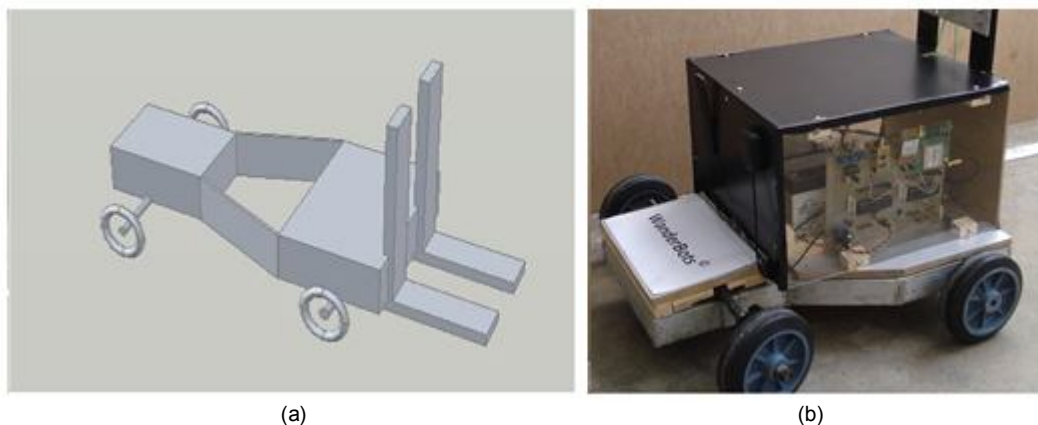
Wander Forkerbot(a) CAD model (b) Fabricated prototype
